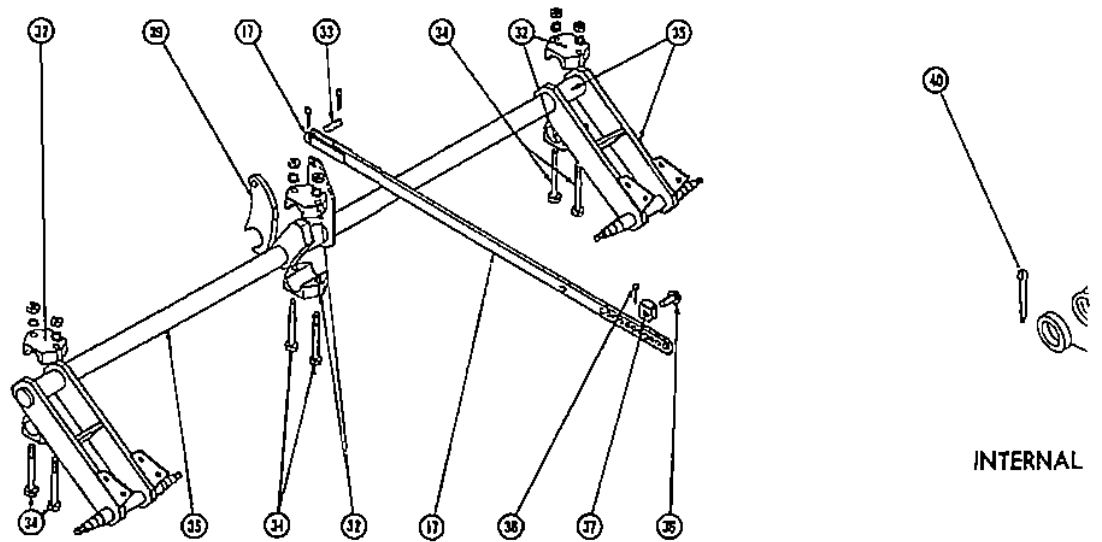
WHEEL AXLE AND DEPTH ADJUSTMENT ASSEMBLY
